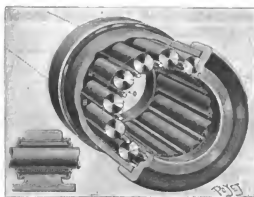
MOVABLE ROLLER CAGE WITH PATH CONNECTED WITH THE BEARING, A.
